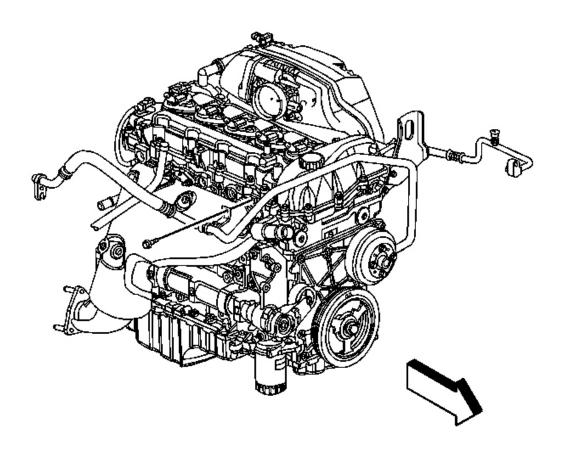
View Of Engine Wiring Harness Conduit Courtesy of GENERAL MOTORS CORP.
